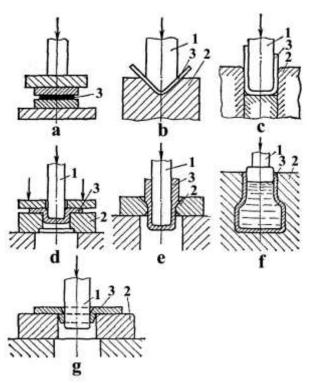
Forming operations of sheet stamping: a-straightening; b-bending; c, d, e-draw-forming, f-spread forming, g-flanging; 1 – upper die (punch); 2 – lower die; 3 – billet.
